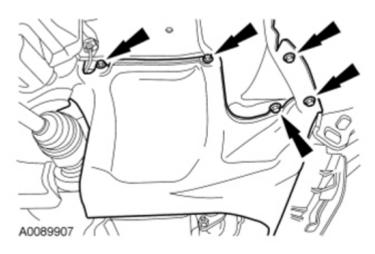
Locating RH Splash Shield And Retainers Courtesy of FORD MOTOR CO.
